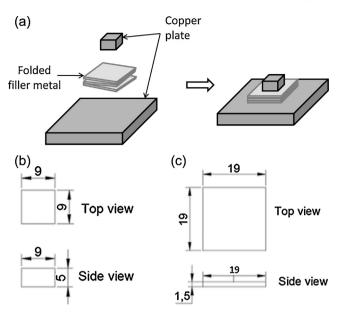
(a) Schematic of brazing sample arrangement. (b) Dimensions (in mm) of upper base metal. (c) Dimensions (in mm) of lower base metal.
